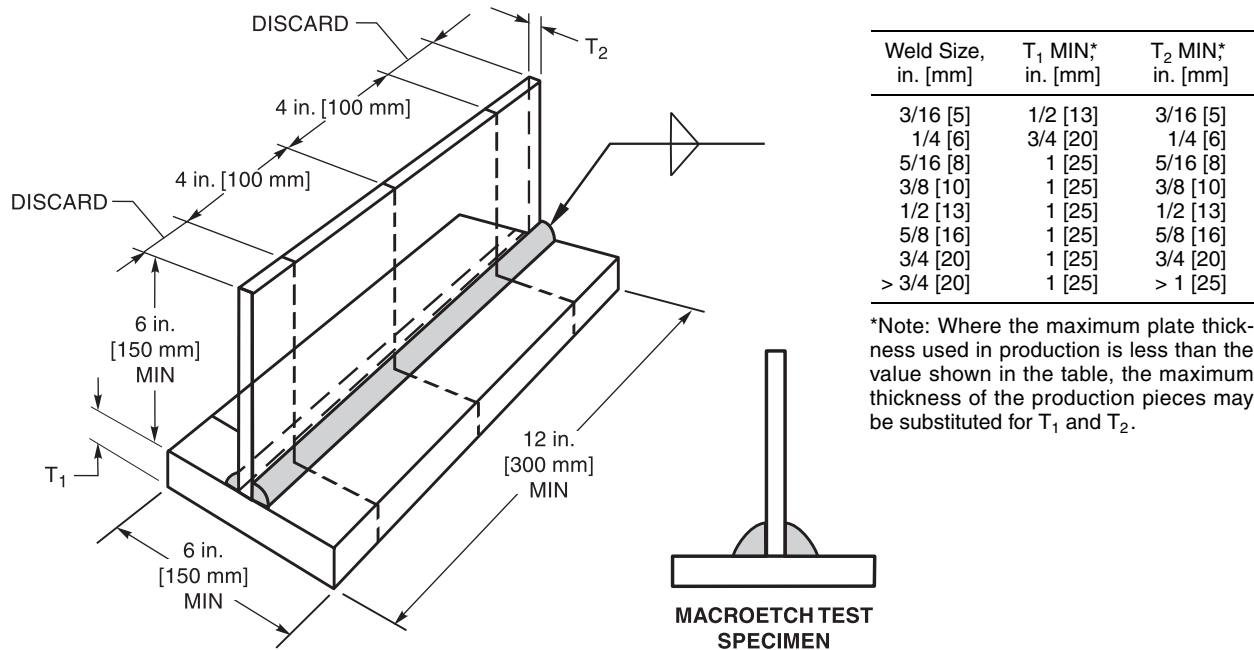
Fillet Weld Soundness Test for Procedure Qualification
